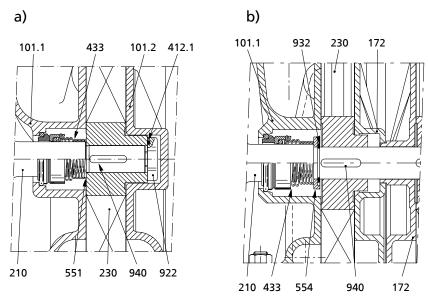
Mechanical seal design T, operating mode B a) Sizes 40-146, 50-164, 60-200, 65-200, 80-240-11 and 80-240-15 b) Sizes 42-146 and 52-164
